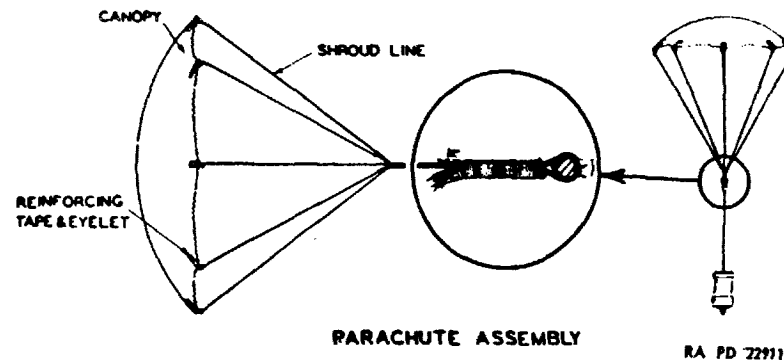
SHELL, Illuminating, M83 — Parachute Assembly
